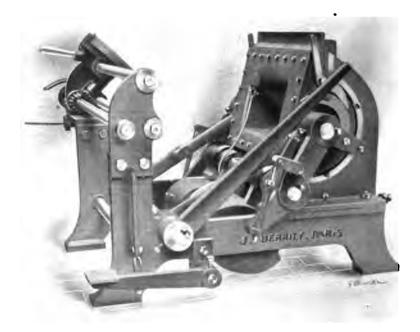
Casting-press for semicylindrical plates; water-cooled with automatic To face plate XCVI.] closing and head-cutting gear.
